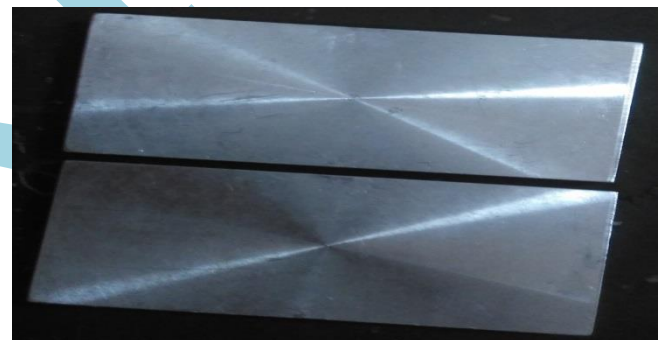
Speciment for Friction Stir Welding
